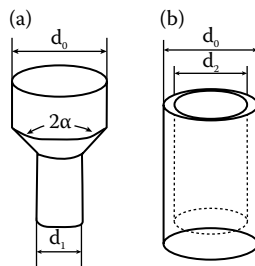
Dimensions of extruded products, d_0 , Billet's diameter, d_1 , extruded rod's diameter, d_2 , Extruding punch's diameter. (a) Extruded rod; (b) Extruded can
